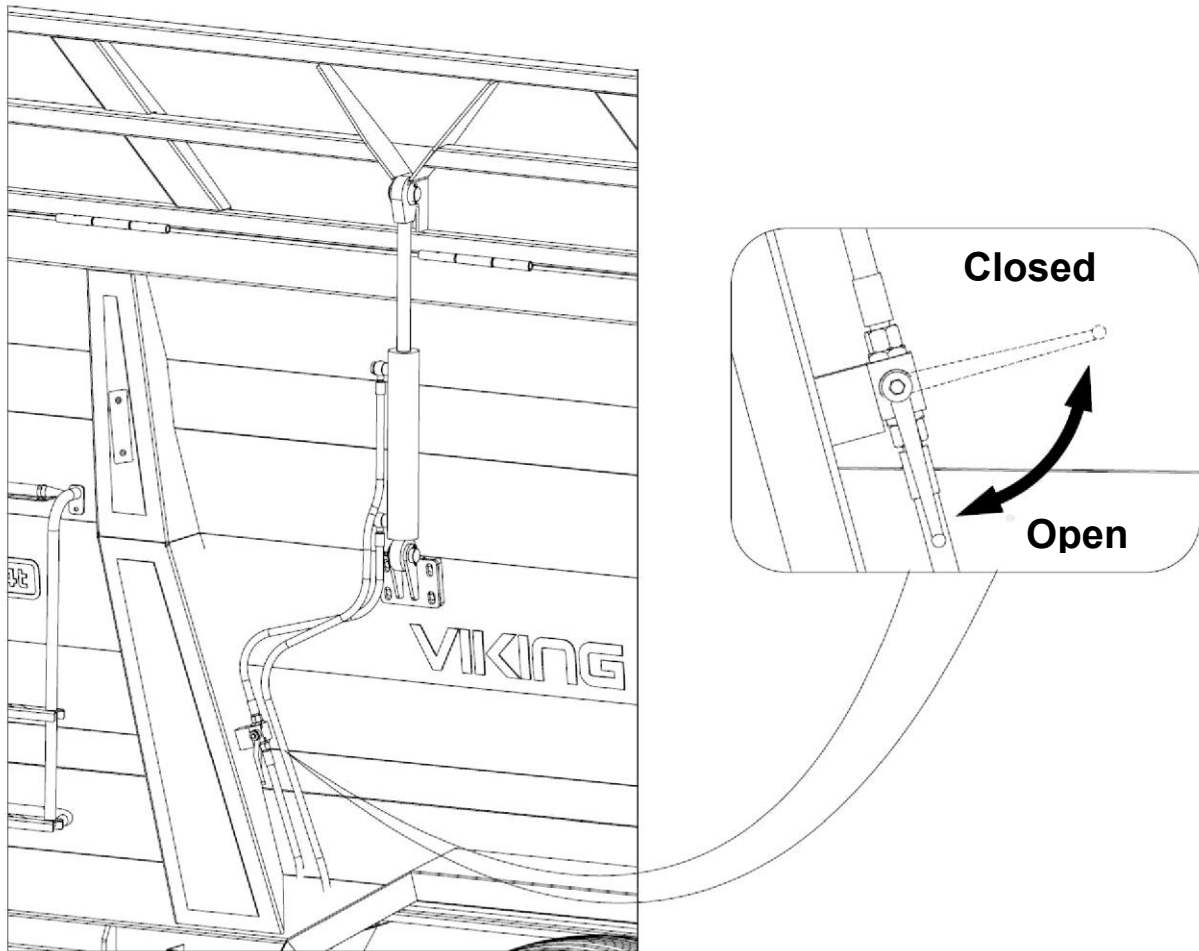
Hydraulic control (shut-off) valves for hydraulic extensions on both sides of the load body
